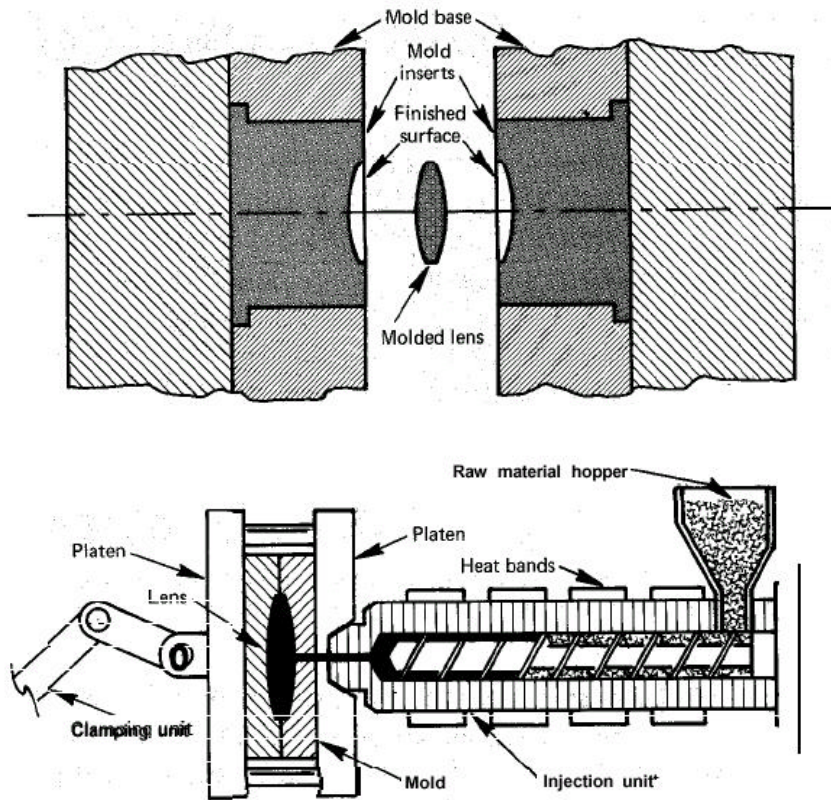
Injection-molded optical elements are formed in steel molds that contain machined cavities with surfaces polished to an optical quality (top). The molten raw material is forced under pressure into the temperature-controlled mold (bottom). After cooling, the parts are removed from the gates and runners and require no further finishing process.
